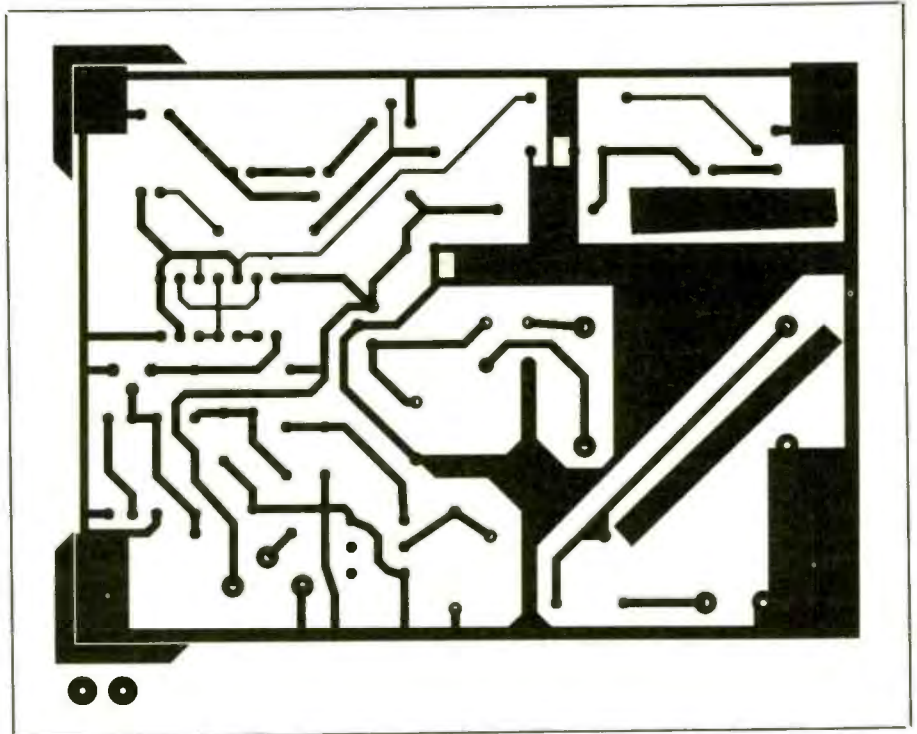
Actual-size etching-and-drilling guide for receiver printed-circuit board.
